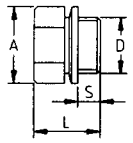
Nut for flange type rotavator blade of agricultural tractor
